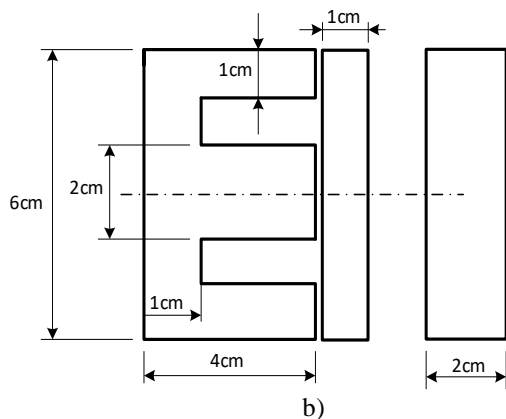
Developed prototype dimensions of the core formed by "E" and "I"
